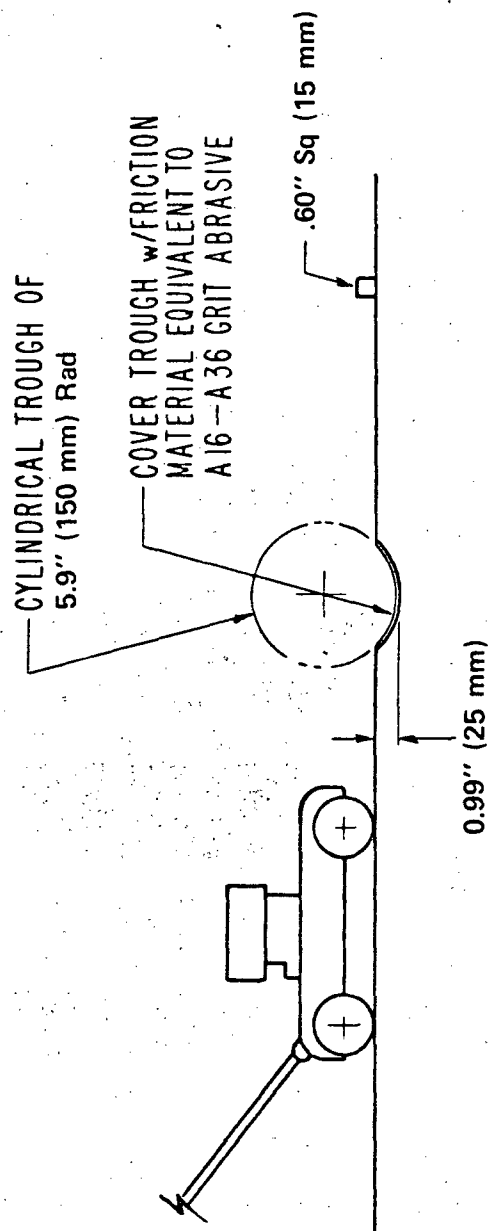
OBSTRUCTION TEST FIXTURE
